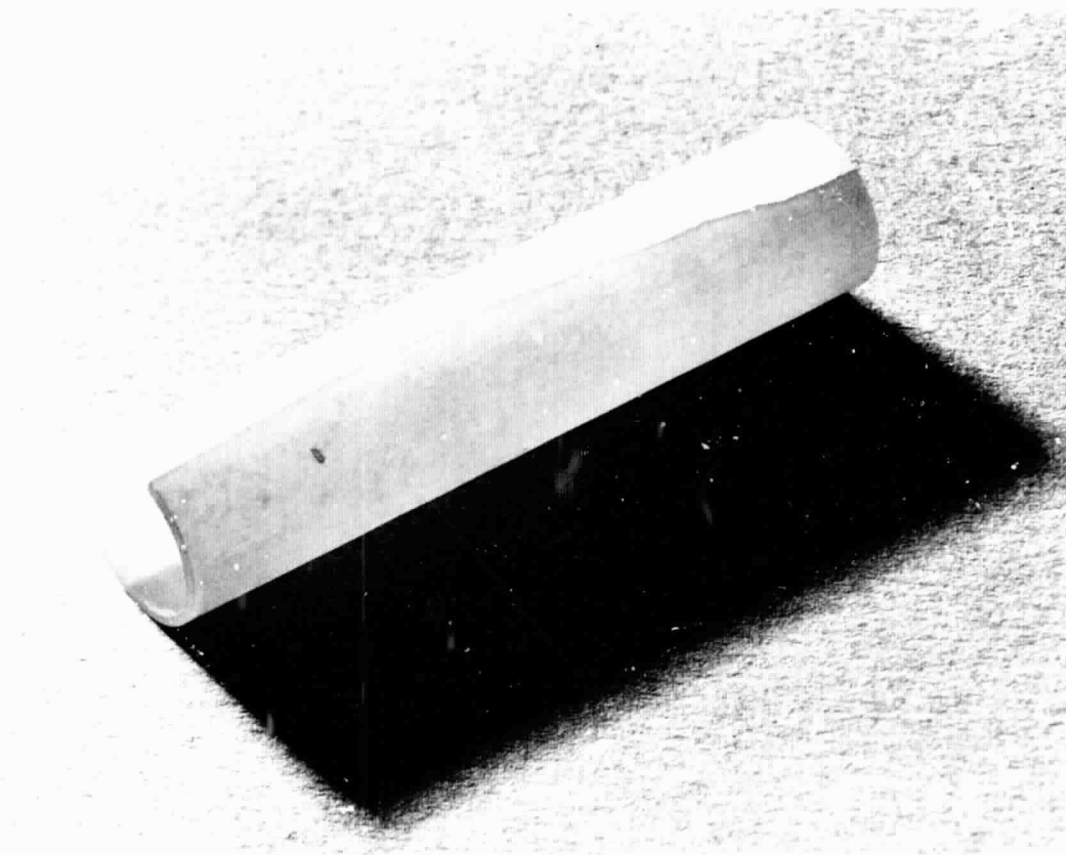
0.030 Inch Wall Lucalox Test Specimen Showing Thermal Crack
